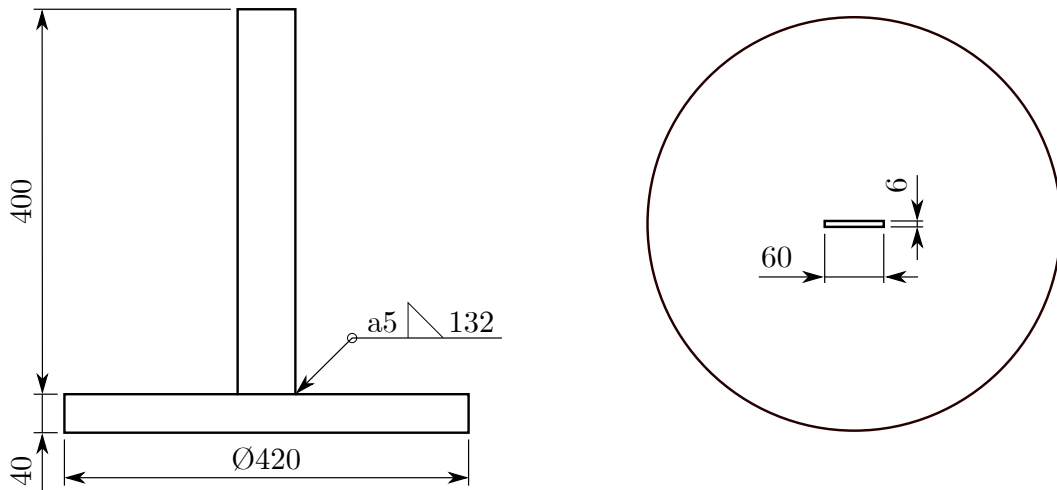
Fixed beam geometry - front view Fig. 2.13: Fixed beam geometry - top view
